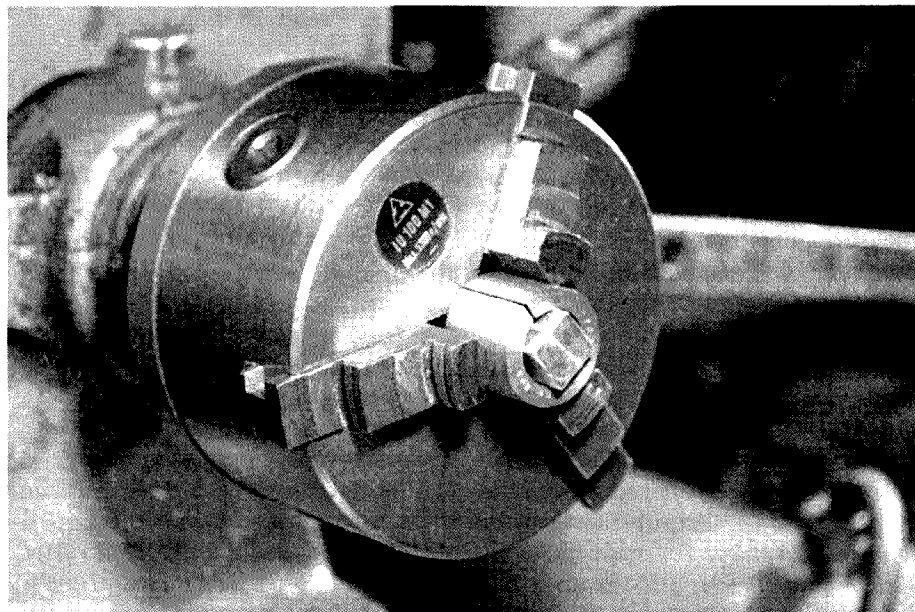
A collett in a 3-jaw lathe chuck holding a length of 12 mm rod.
